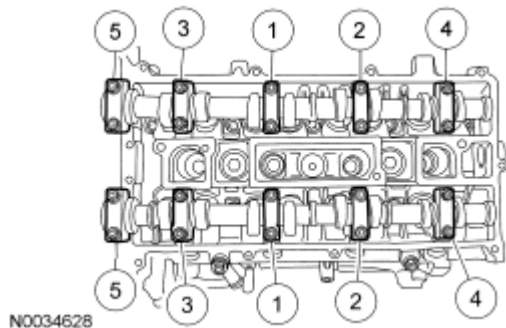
Identifying Loosening/Tightening Sequence Of Camshaft Bearing Bolts
